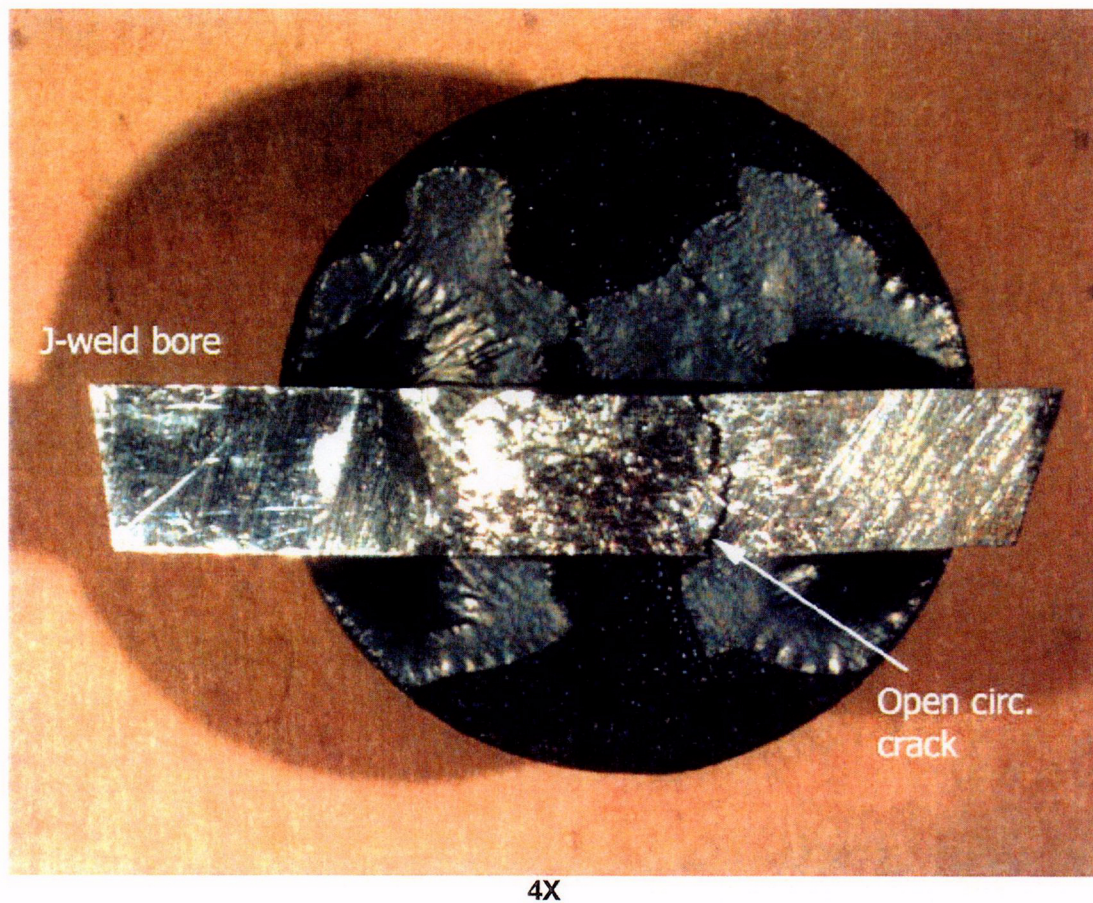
Macro photograph of the opened-up circumferential cracking in the J-groove weld at  $\sim 30^\circ$ . The underside surface of the J-groove weld (in contact with RCS) is shown. Refer to Figures 5.6 and 5.8 for the sample location. The rectangular sample (A2A6A2C2) is secured to the round SEM stub with black carbon tape.
